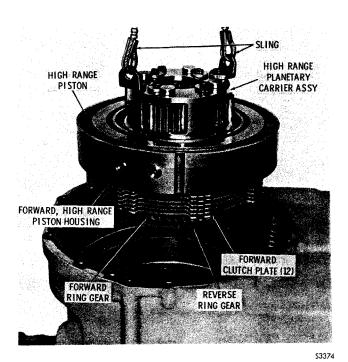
Removing forward- and highrange planetaries, clutch piston housing and associated parts
